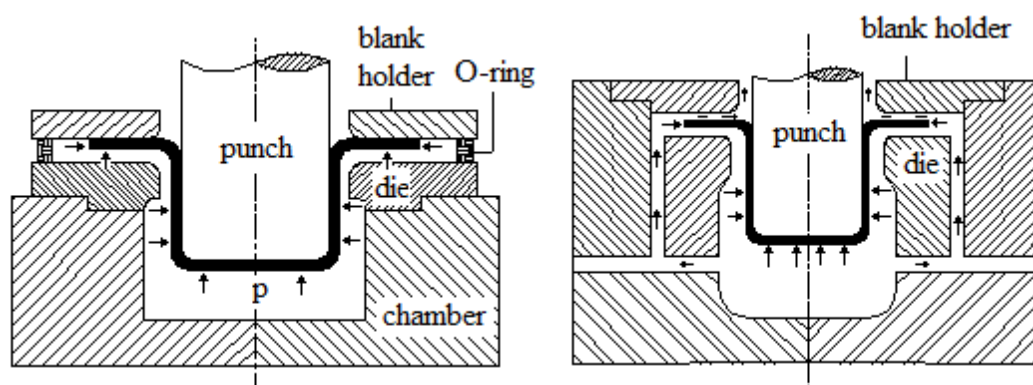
Tool set-up for: (a) hydromechanical, (b) hydro-rim, deep drawing process (17)
